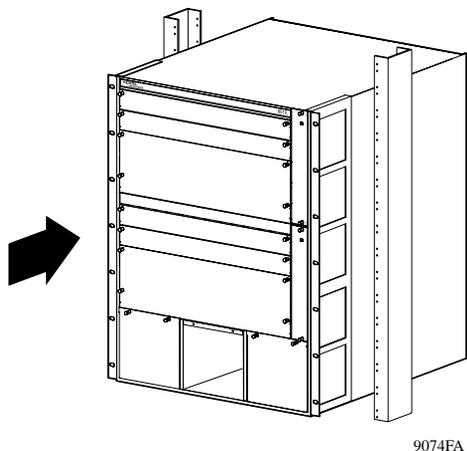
Aligning the rack-mounting brackets with the equipment rack: 8006 Chassis
